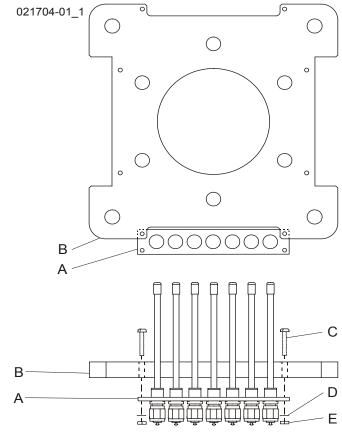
Installing the Gas Riser on the Mounting Plate
